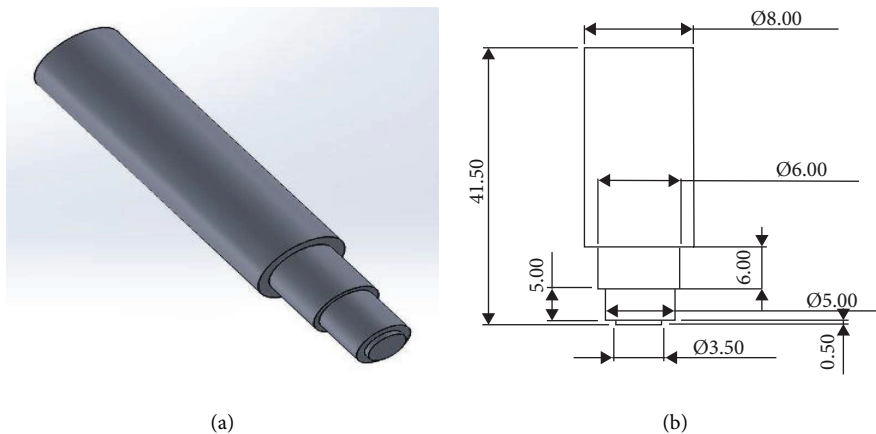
Microfriction stir welding tool design (a) and tool dimensions (b).
